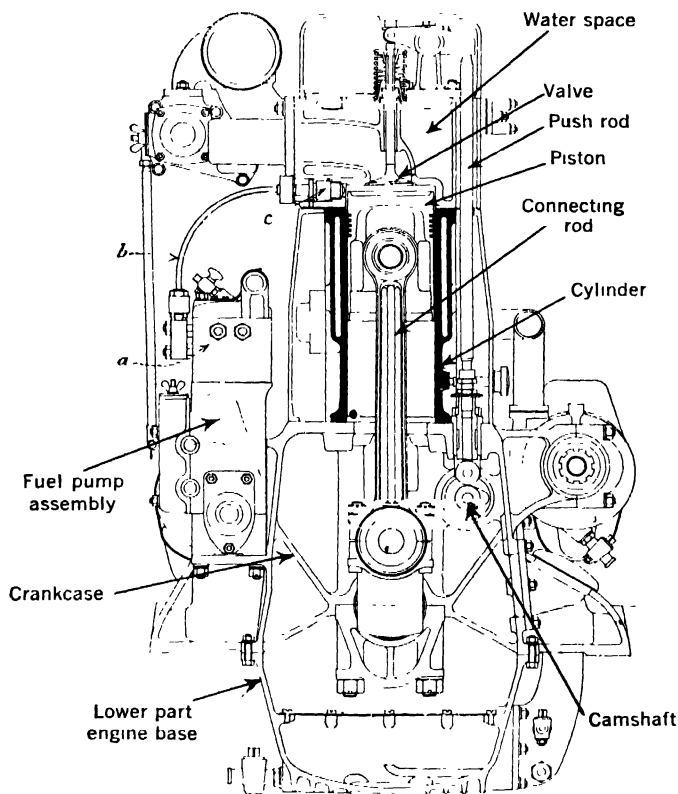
Cross Section Showing Construction of M.A.N. Automotive Diesel Oil Engine, Showing Fuel Injection Apparatus. The Fuel Pump (a) Supplies the Fuel Injection Nozzle (c) by Oil Pipe (b).
